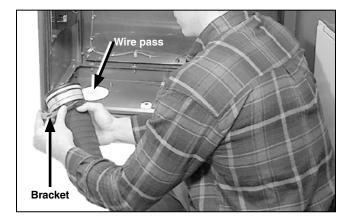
Placing the holding brackets in the grooved channel of the conduit.
